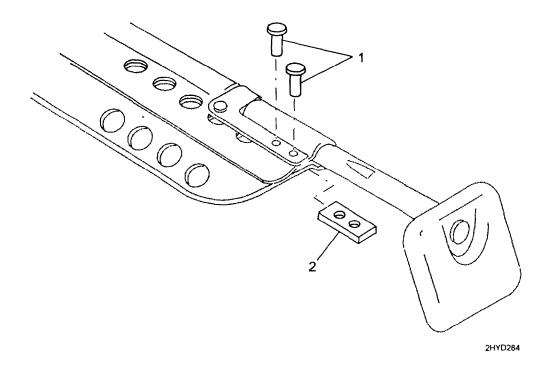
Group 070102 Machine Gun Leg (Left), PN 7269046
